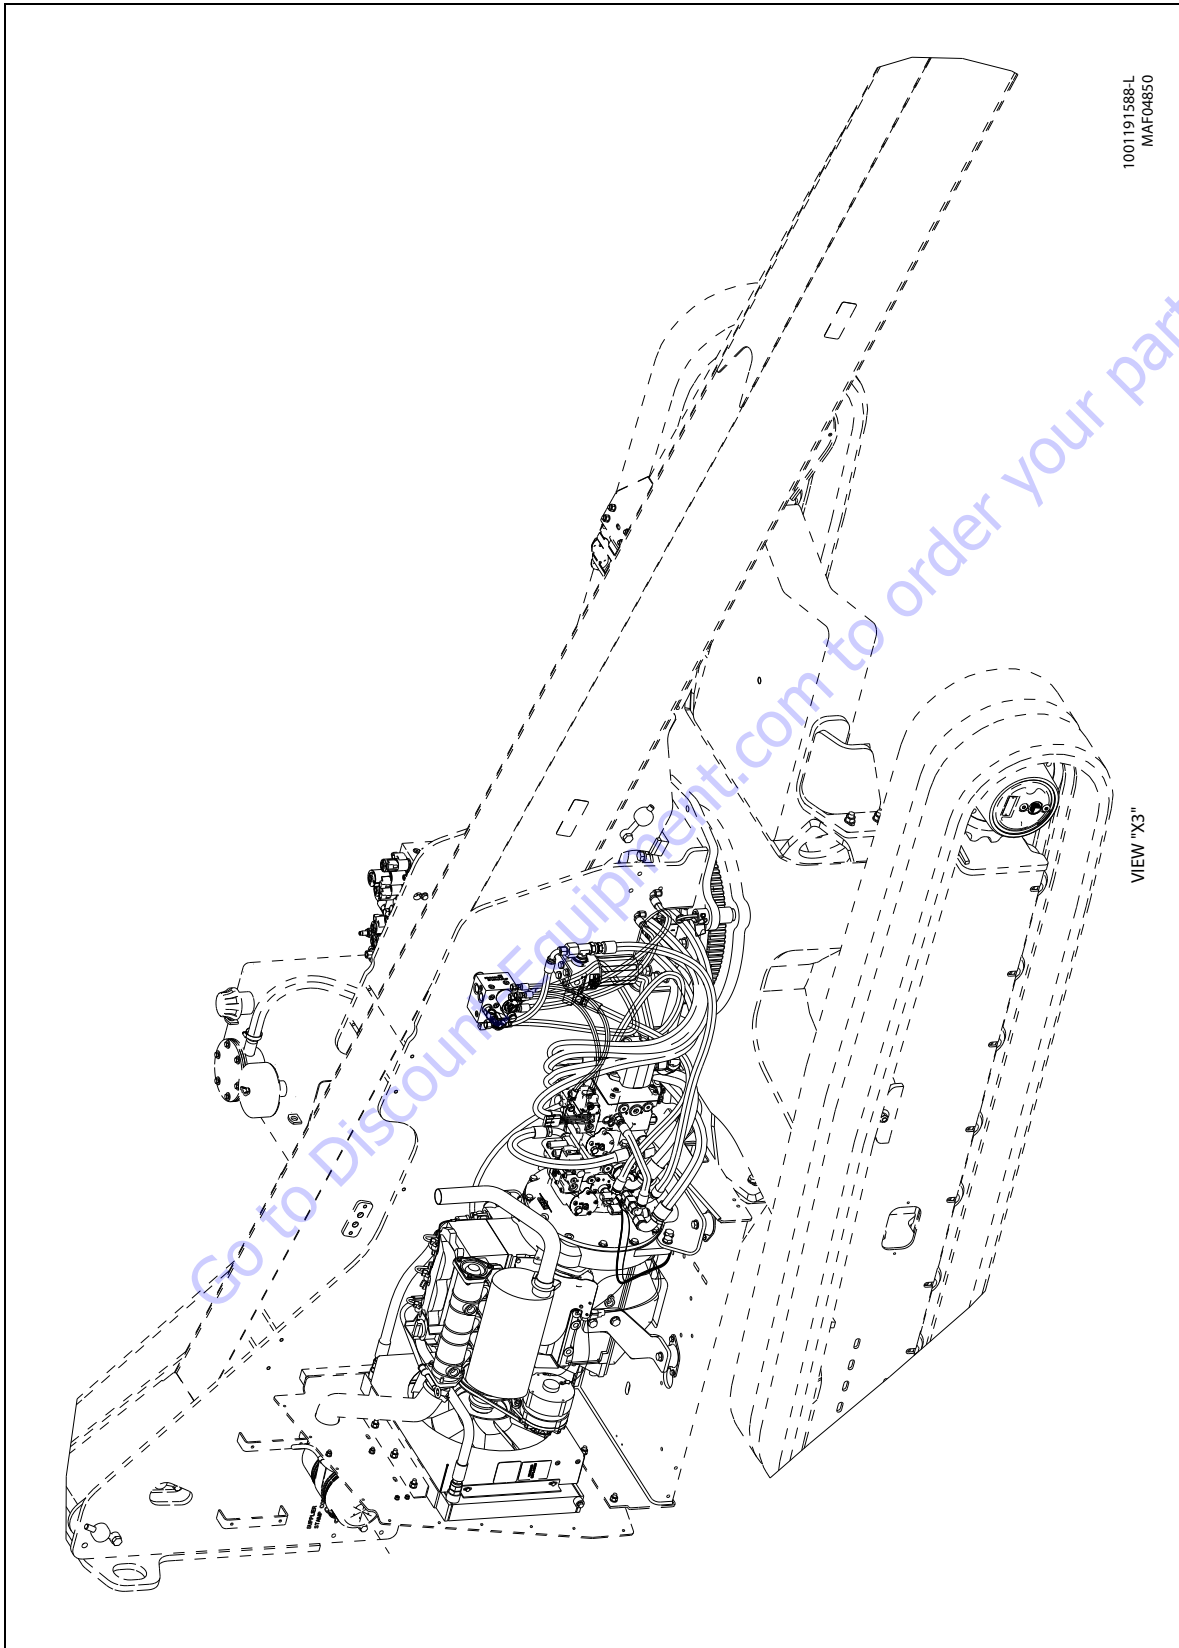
Hydraulic System Installation (4005C) - Sheet 11 of 16
